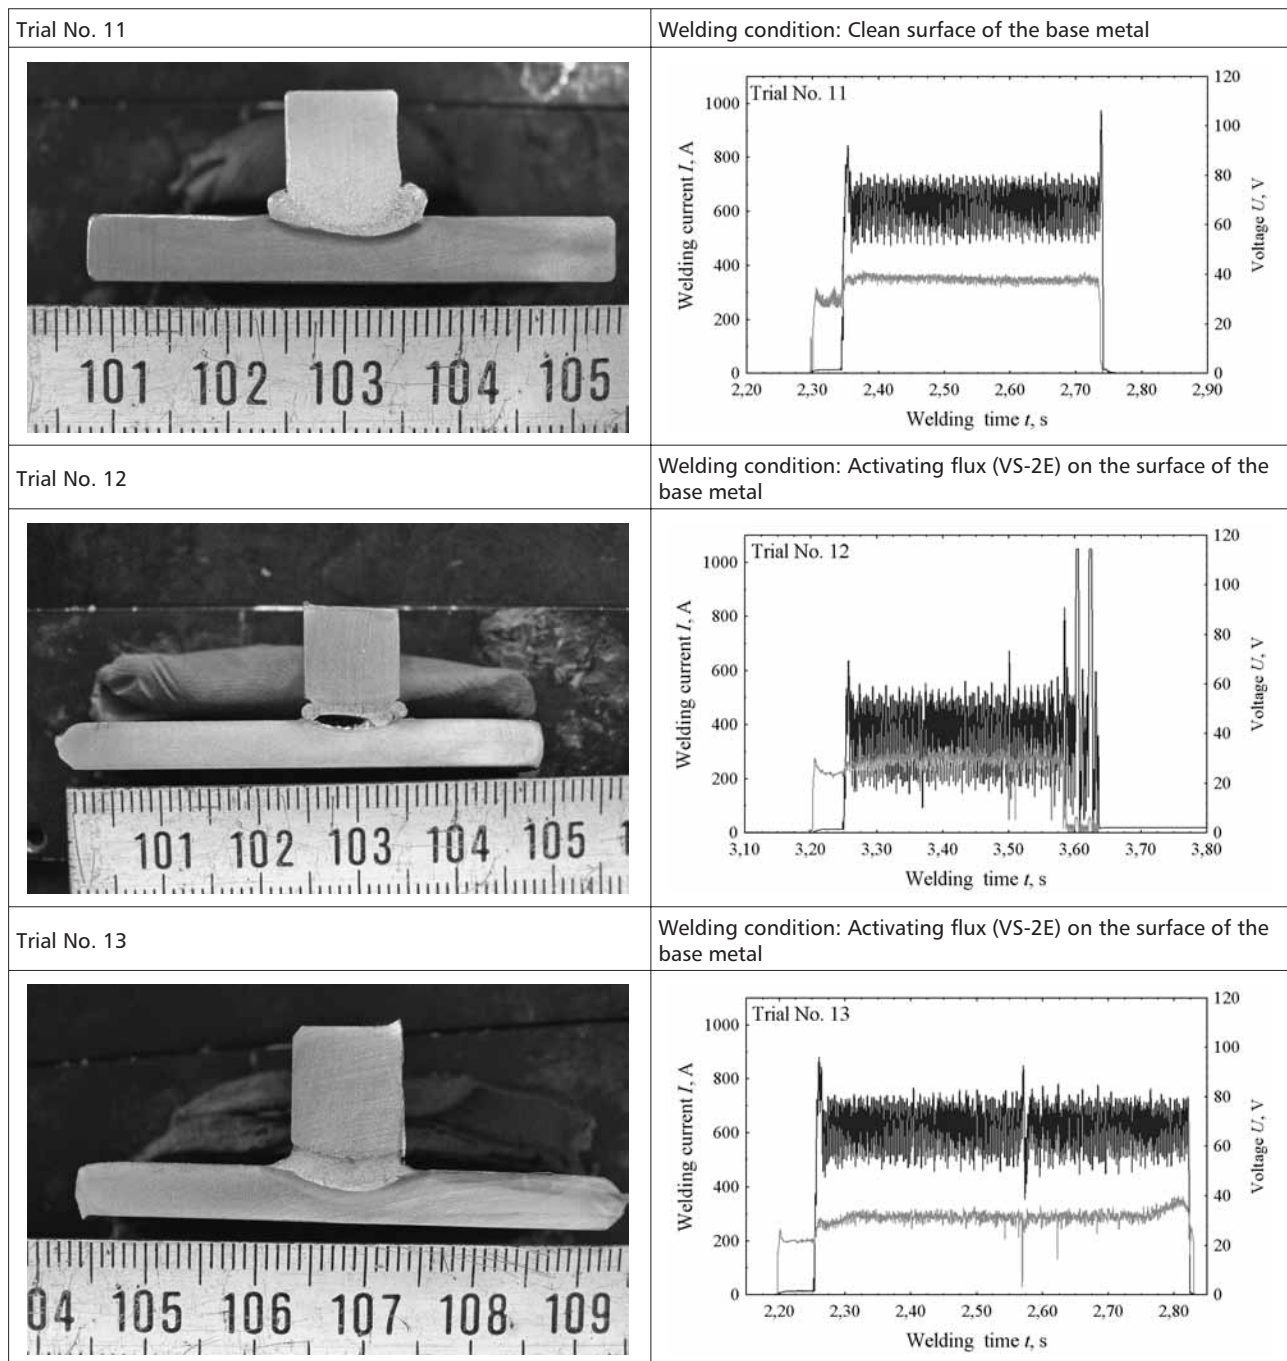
Weld joint macrosections and welding parameters distribution for weldments with and without the activating flux VS-2E (setup of experiment in Table 1)
